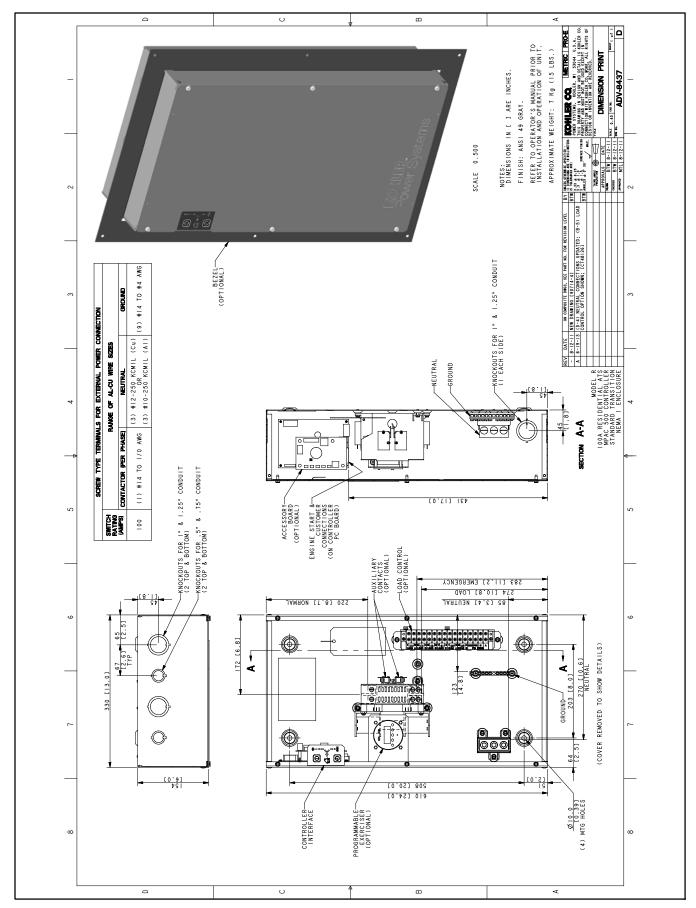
Enclosure Dimensions 100 Amp NEMA 1 without Load Center, ADV-8437
